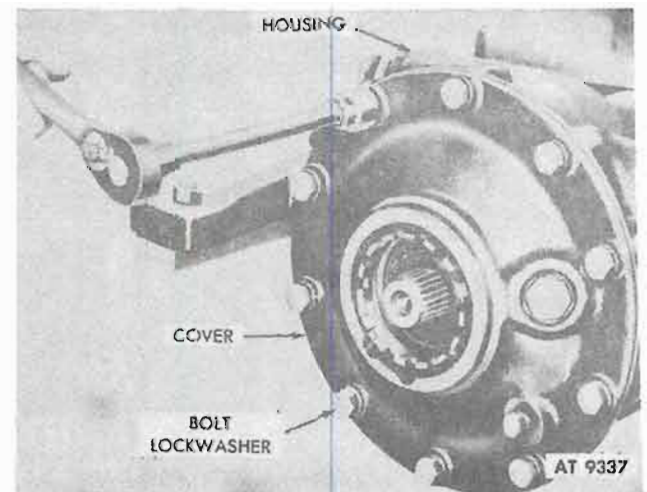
Housing Cover Plate Retaining Bolts and Lockwashers.
